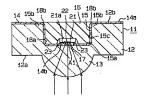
The sectional view of Optical Devices Division in the conventional technology. [Drawing 12] The sectional view of Optical Devices Division in the conventional technology. [Explanations of letters or numerals]
